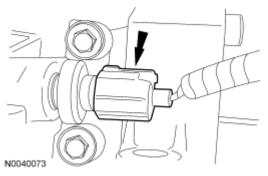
Locating Oil Pressure Sender Electrical Connector Courtesy of FORD MOTOR CO.
